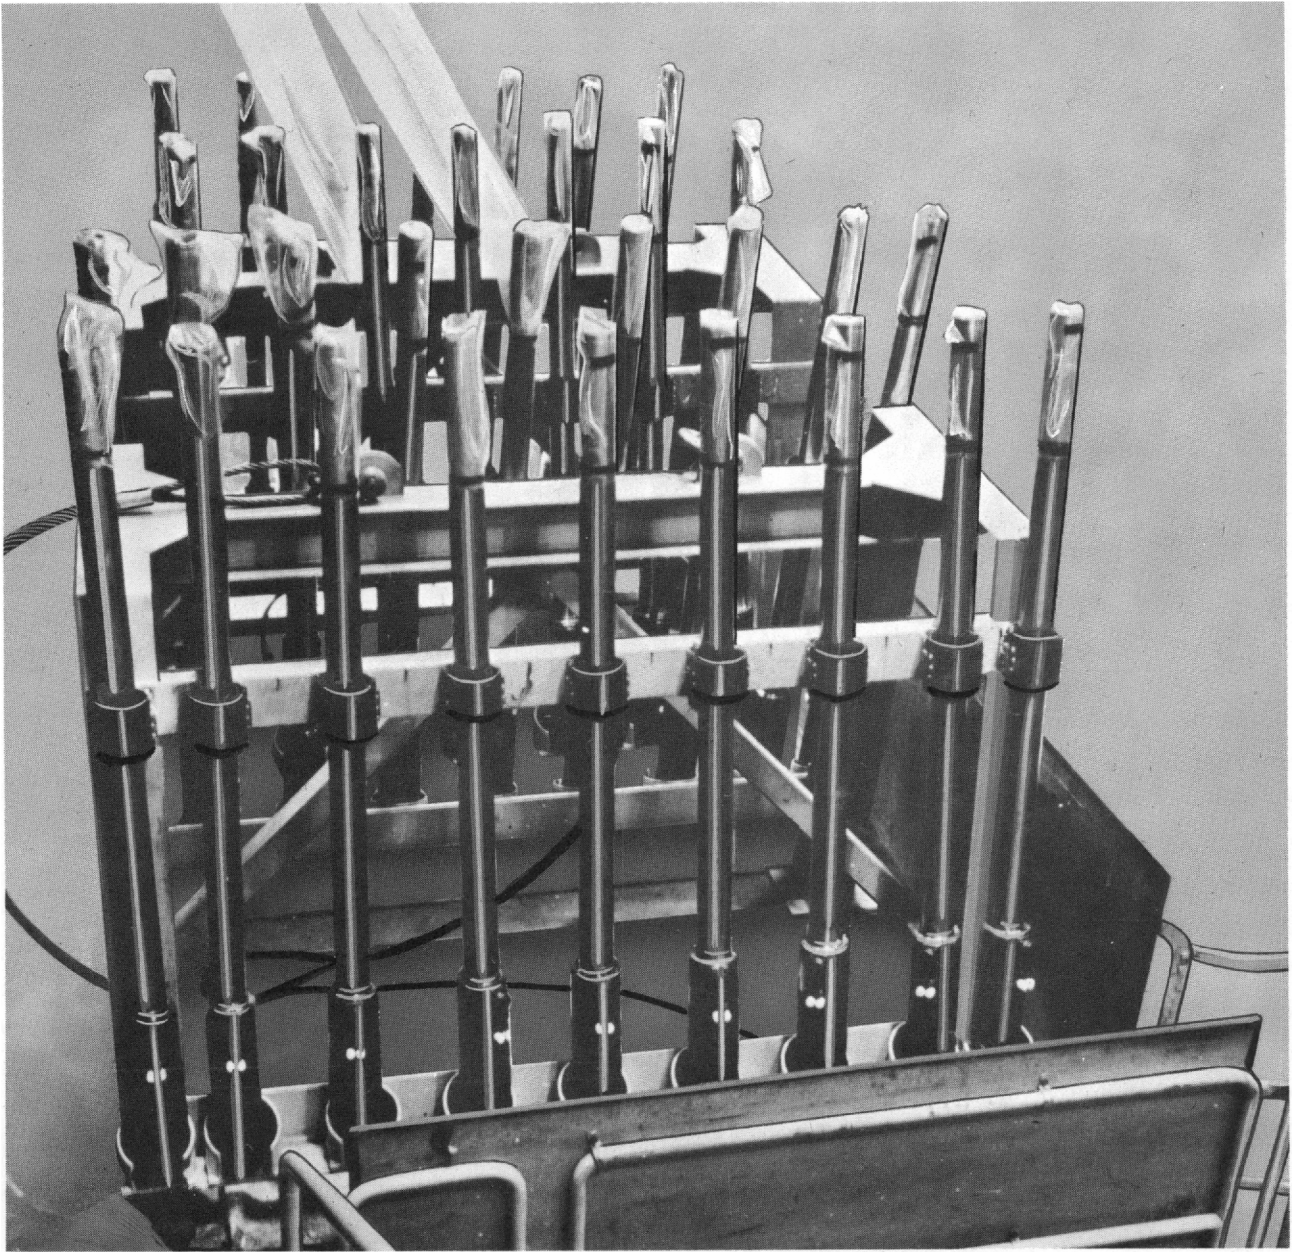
Mechanism Stator and P.I. Coil Assemblies in Storage Racks.
